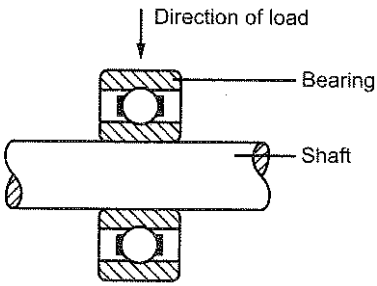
Ant-friction roller and ball bearings used on shafts
